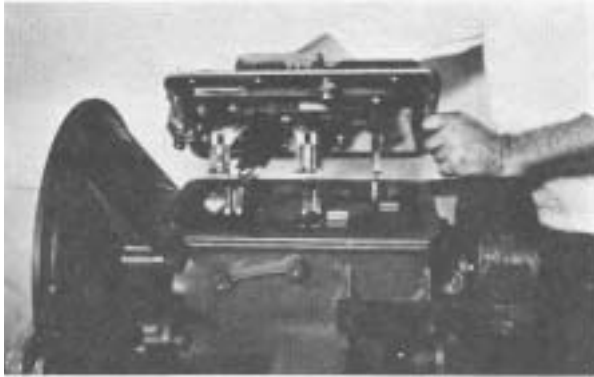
Remove control cover assembly from transmission. Remove backup switch.
